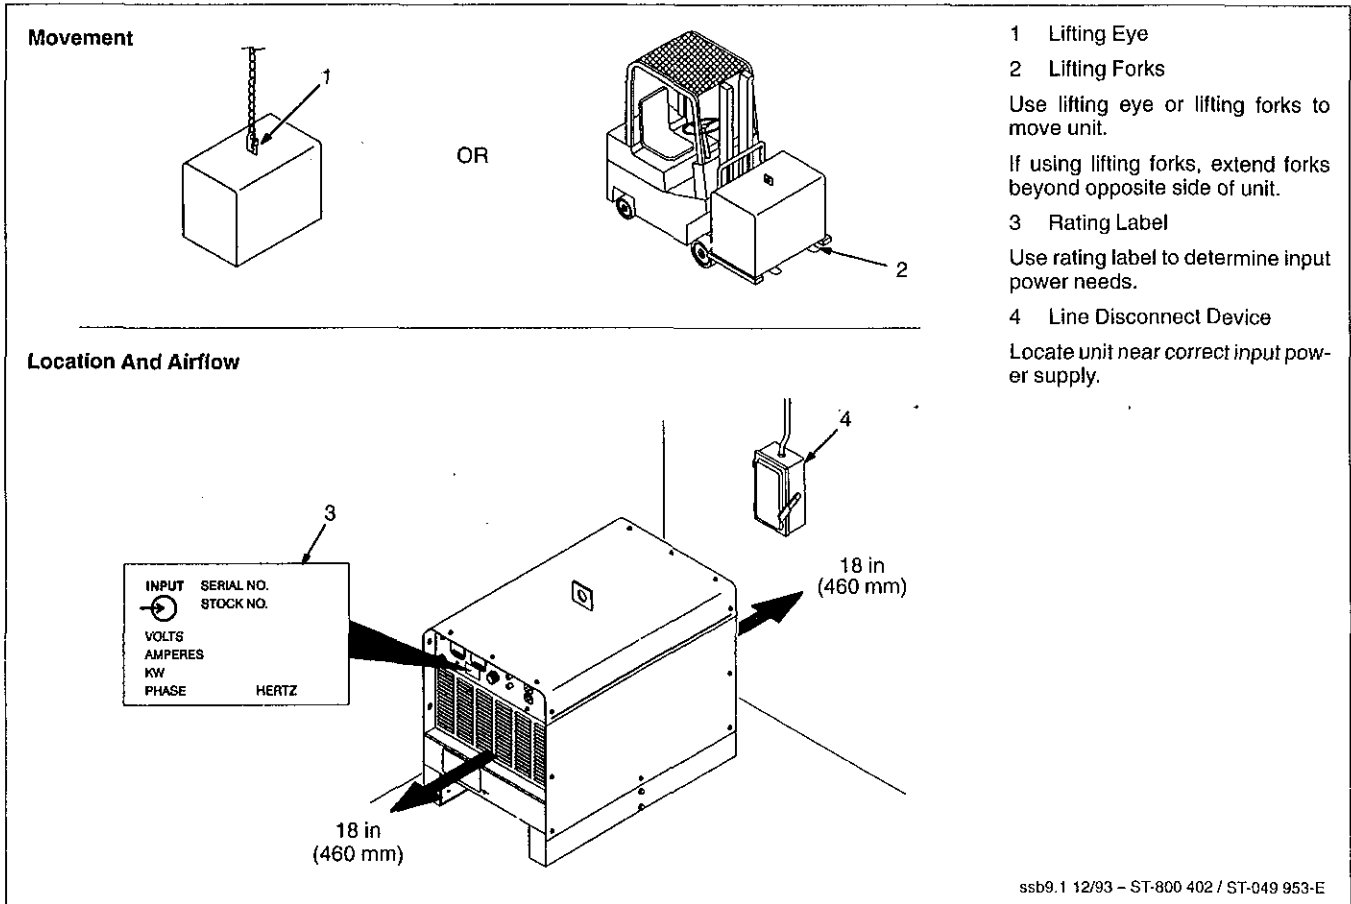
Movement And Location Of Welding Power Source
